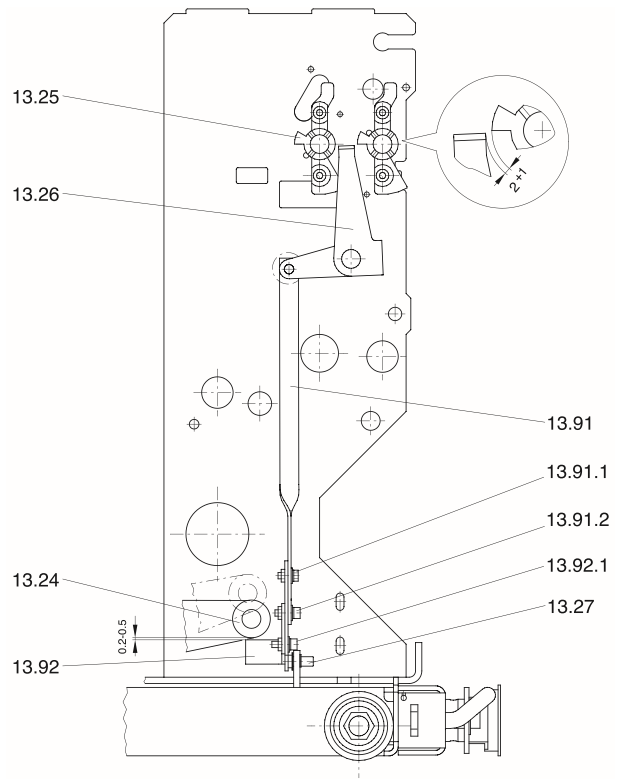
/6: Mechanical interlock, withdrawable assembly/circuit-breaker with manually operated withdrawable parts
